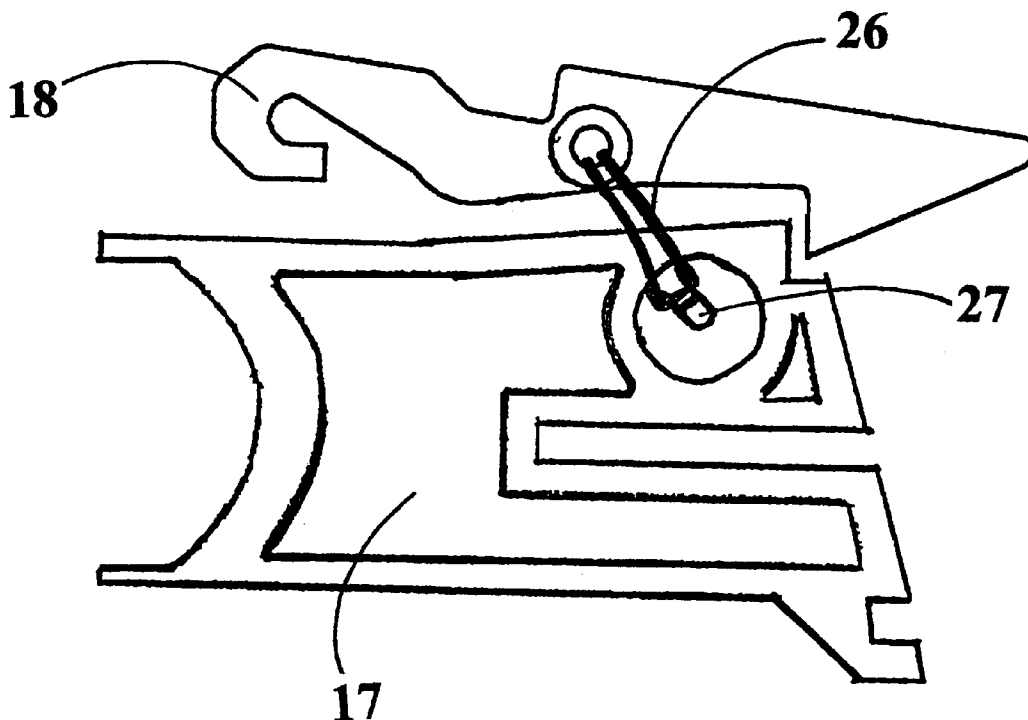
SNAPPER TO TRIGGER CONNECTION
